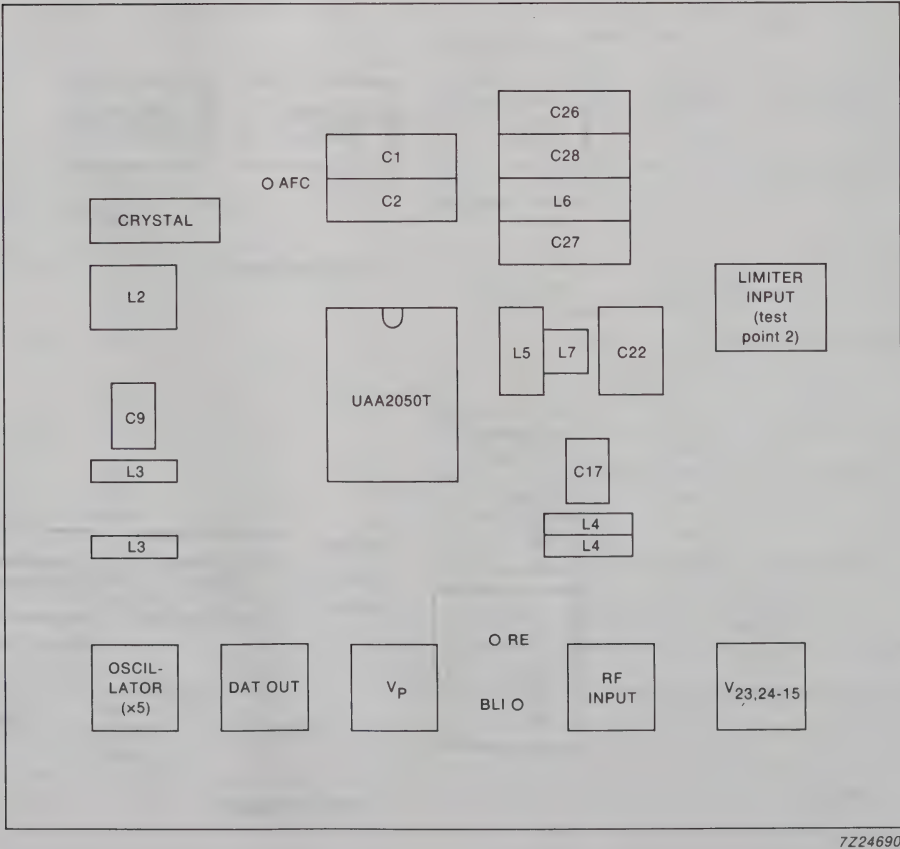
Printed-circuit board for UHF range (component arrangement).
